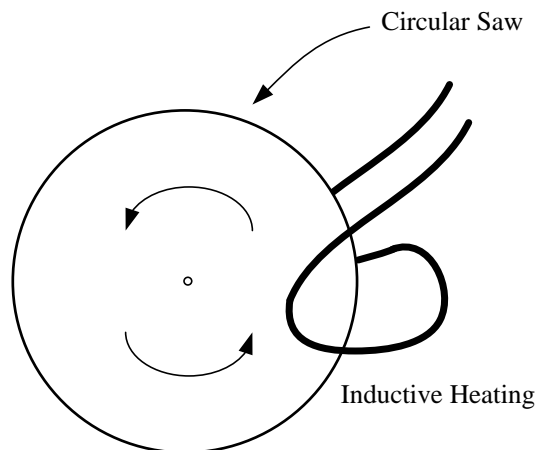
Combining cutting and finishing steps in sleeve cutting process.
